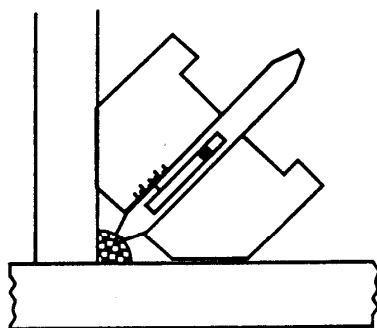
Measuring Concave Fillet Weld Size
